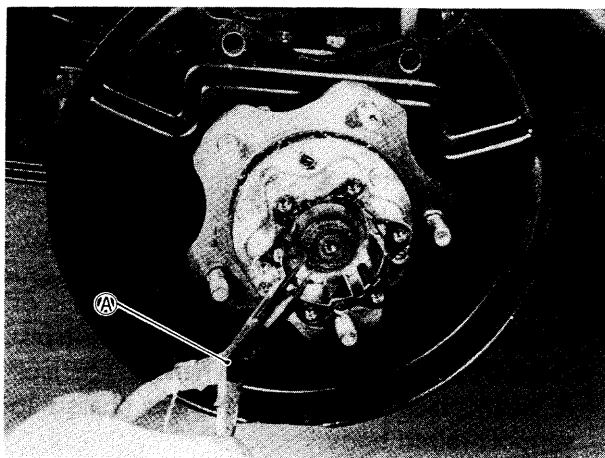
A Circlip remover (09900-06107)
